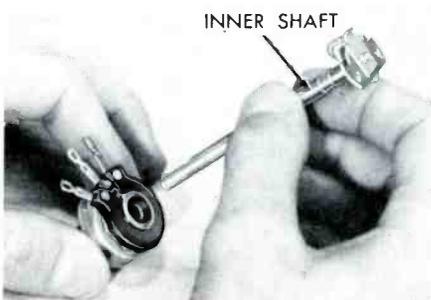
B. The Inner Shaft Is Inserted in the Rear Element.
